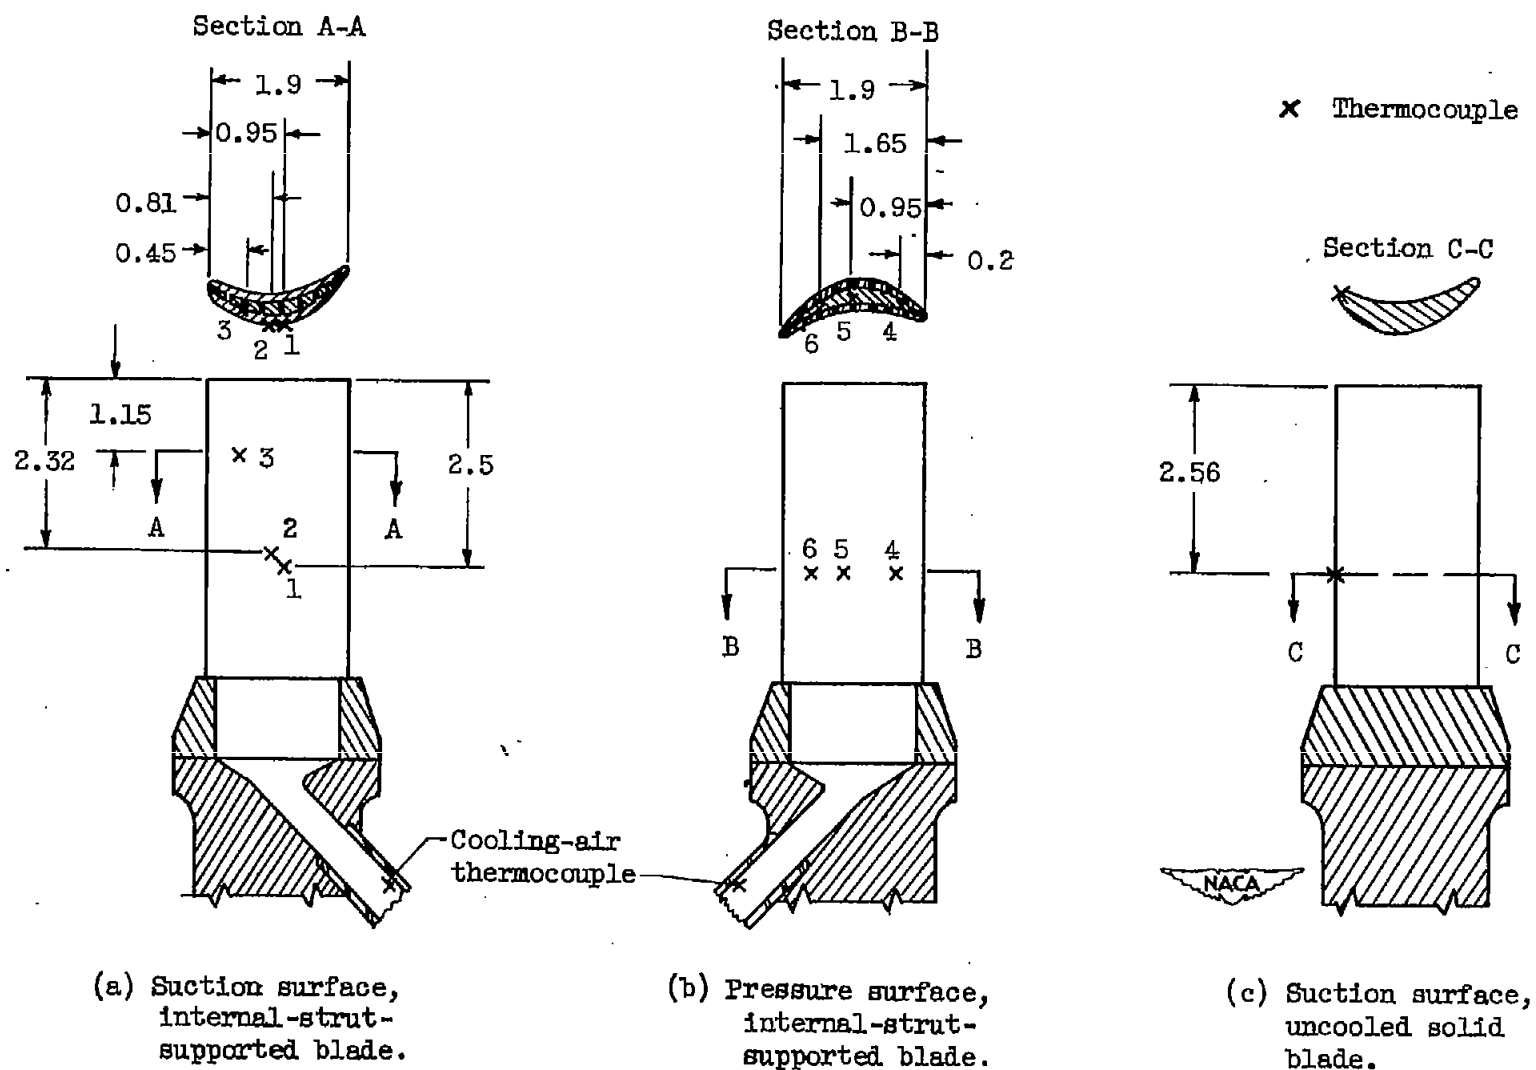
Schematic diagrams of thermocouple locations on full-length internal-strut-supported blade and uncooled solid blade. (All dimensions in inches.)
